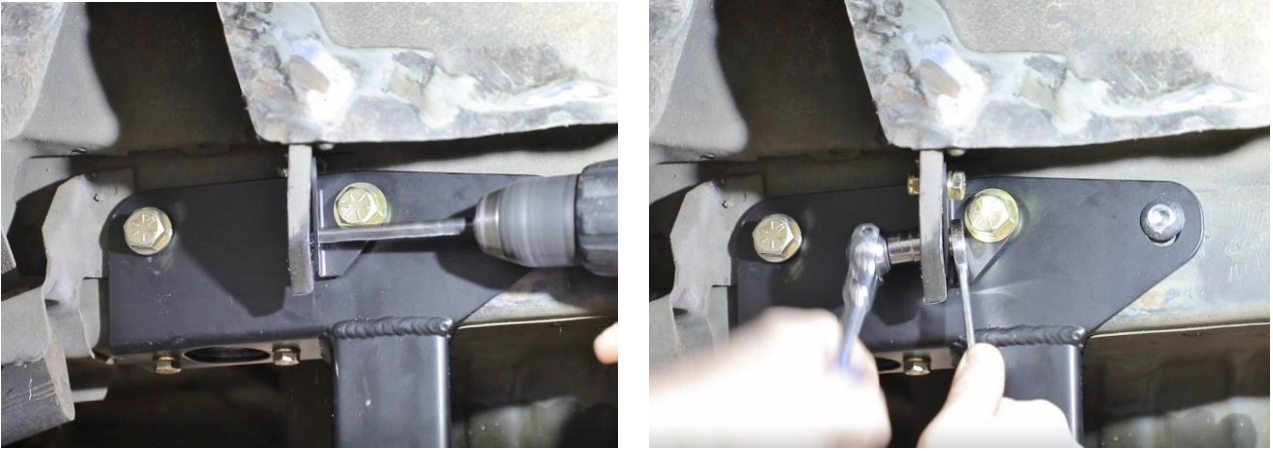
Locate Track Bar Shock Tower Reinforcement Bracket
